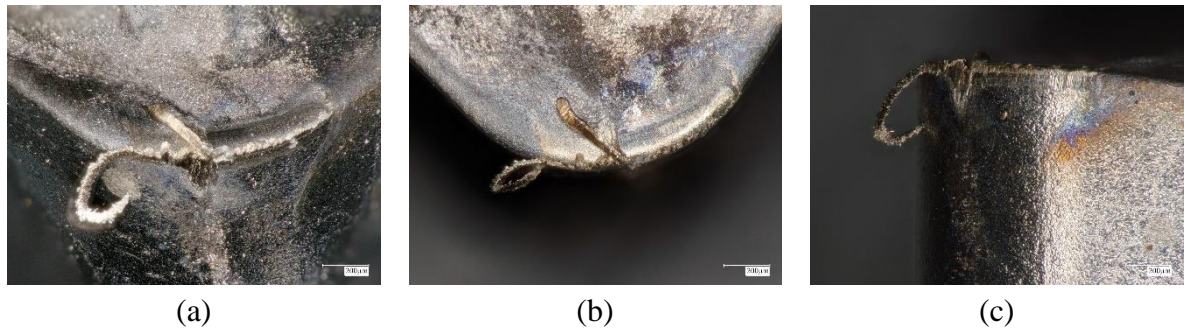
Optical microscope image of sticking and filling mechanism of workpiece material in the DOC notch groove formed on the CERMET tool by chipping (a) inclined view of notch groove where the workpiece material stick and form chip, (b) Rake view (c) side view (1600m)
